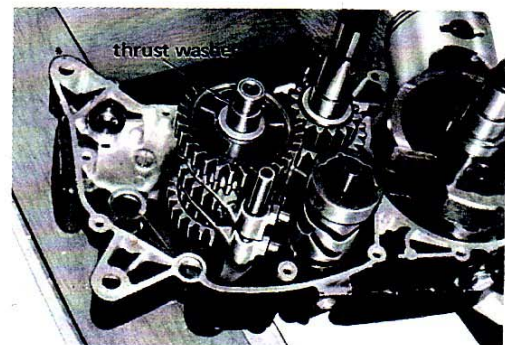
Inserting shifting fork into the fourth and fifth drive gear
